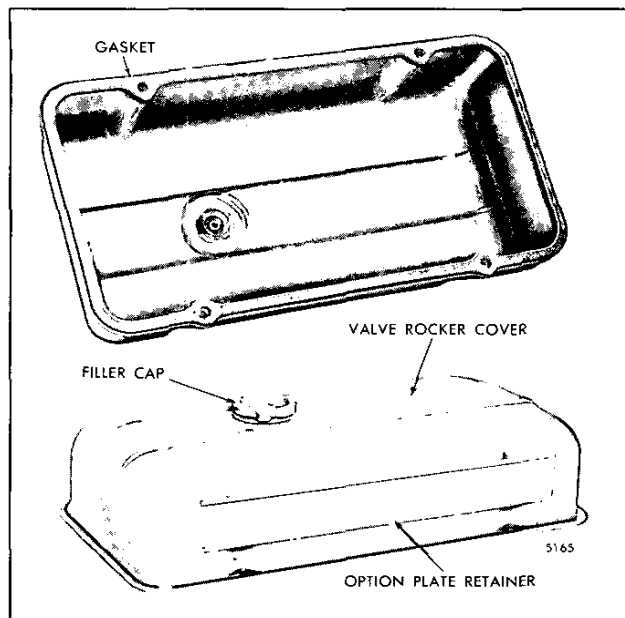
Typical Stamped Steel Valve Rocker Cover Assembly
